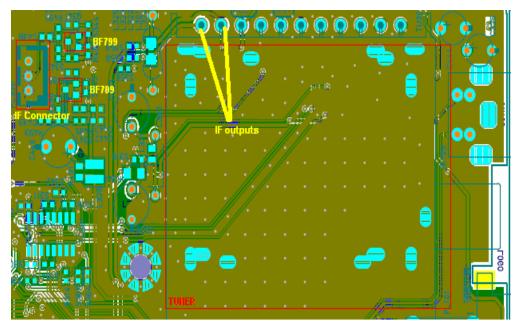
PCB Layout of the tuner, emitter follower and IF connector side.
